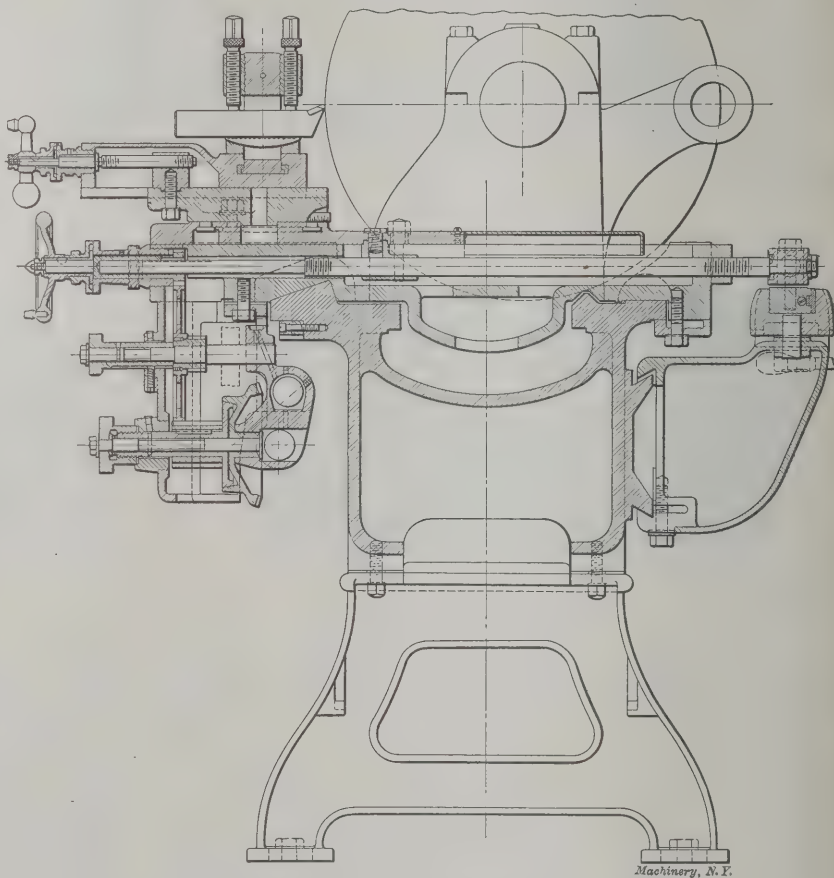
Cross-section through Bed, Carriage and Apron of Le Blond Lathe
